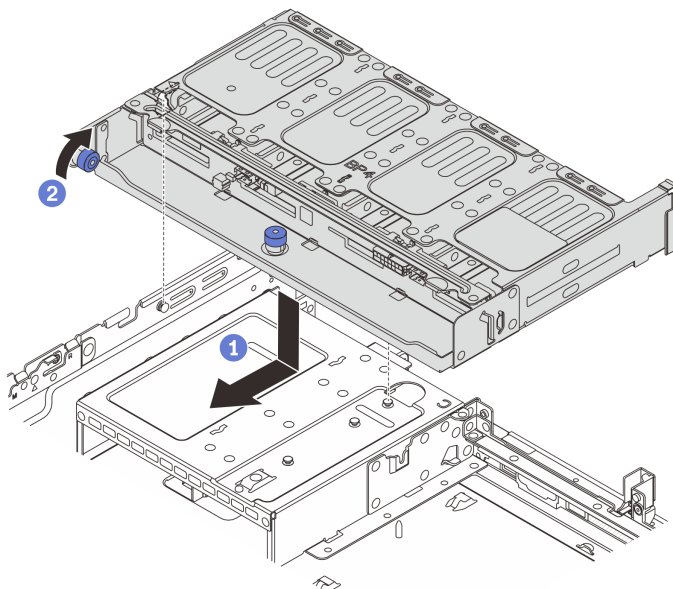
Installing the 8 x 2.5-inch rear drive cage
